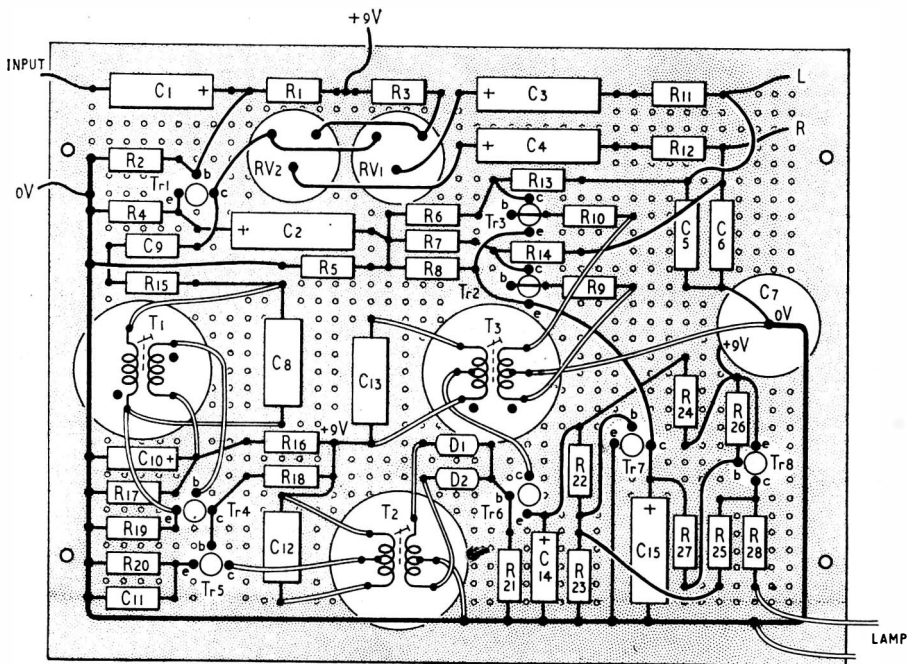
Diagram to show suggested layout and wiring. The components and wires shown unfilled are on the top side of the board (Lektrokitt) and the wires shown solid on the other side, as made clear below ▼
